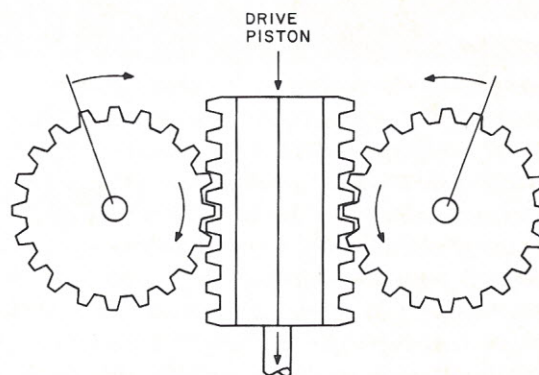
A different approach to finger control uses linear gears. No idler gear or motor is required. Solenoid action pulls the drive piston down, which turns the finger gears inward. A spring returns the piston to open position.
